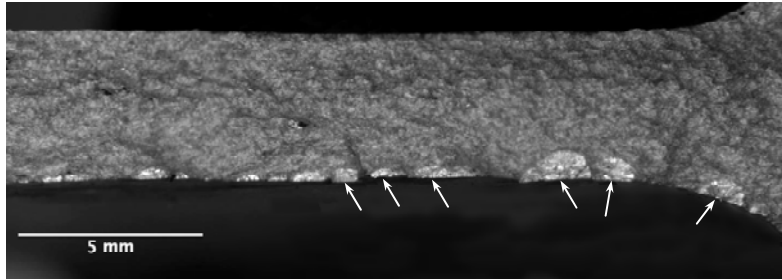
Fracture surface of the broken-open fatigue cracked area in the LHS web taper from an ex-service CB tested until cracking was detected. Some of the exposed fatigue cracks are marked.
